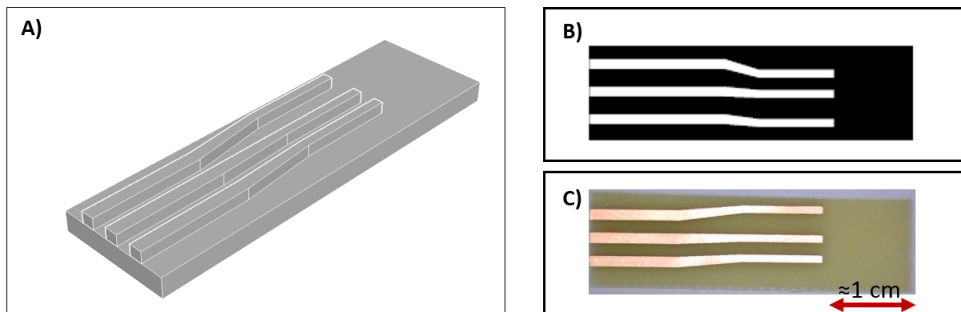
AutoCAD drawing of the adaptor. B) InkScape mask. C) Fabricated adaptor fabricated from standard FR4 copper substrate.
